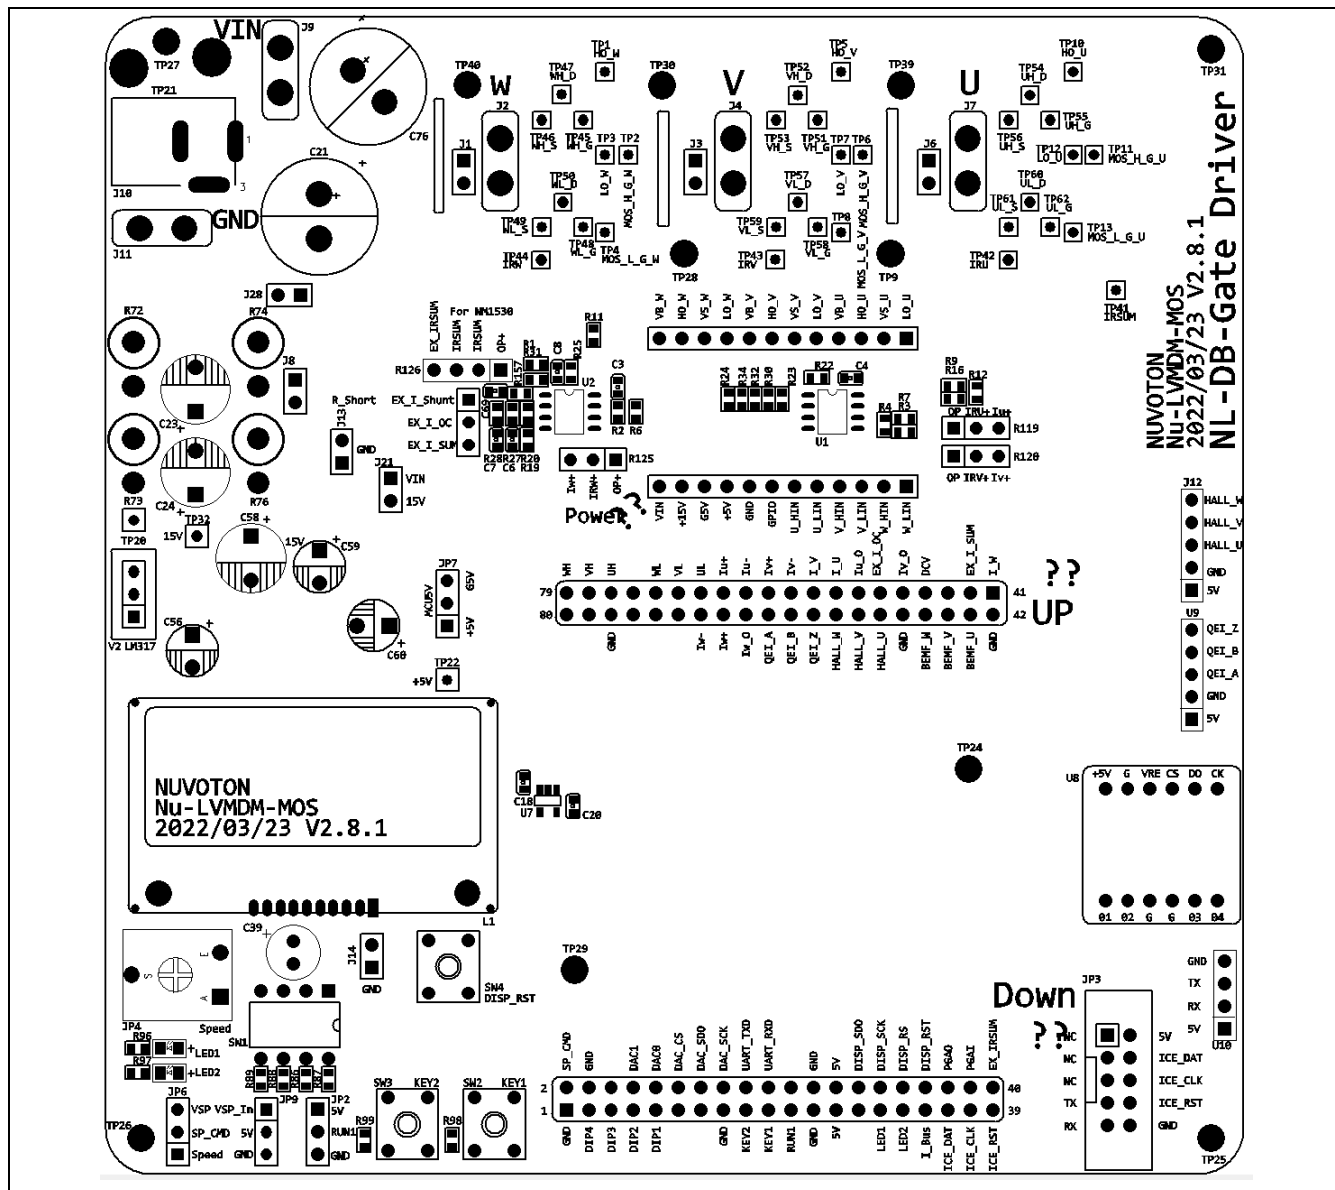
Nu-LVMDM-MOS 2.8 PCB Placement -TOP
